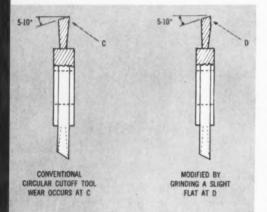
Conventional circular type cut-off tool can be improved by grinding a slight flat on the side relief angle as shown.
